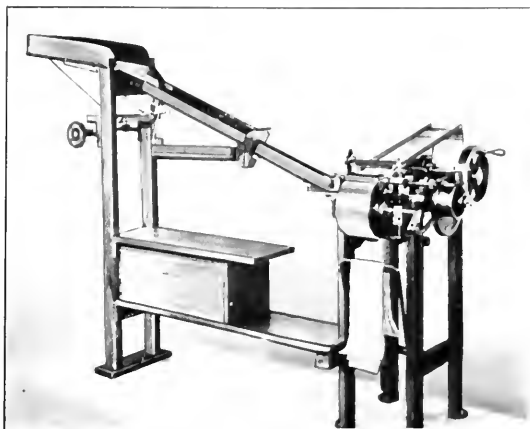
Pin-sticking Machine which counts the Pins and sticks them into Papers
